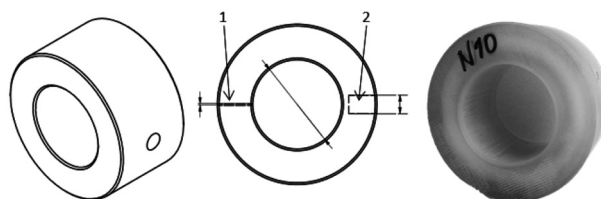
Bearing design (left) and sleeve manufactured using the MJP technology (right): 1 – thermocouple, 2 – force sensor
